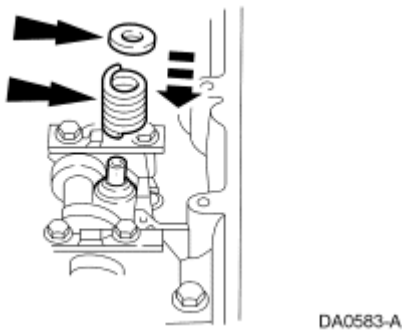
Installing Valve Springs & Valve Spring Retainers
